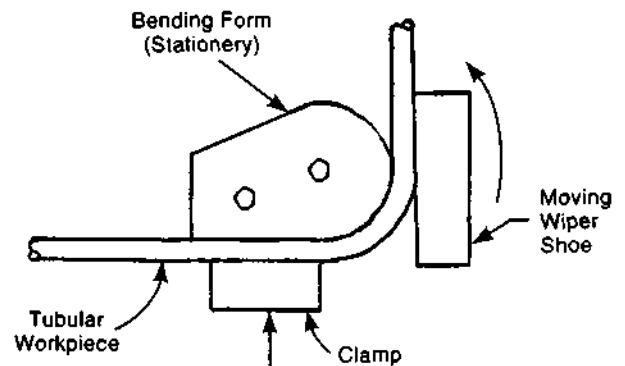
H2b Compression bending of tubing. A moving tool compresses the workpiece against a stationary form. (from Schey, *Introduction to Manufacturing Processes*, McGraw-Hill, New York, 1987)
